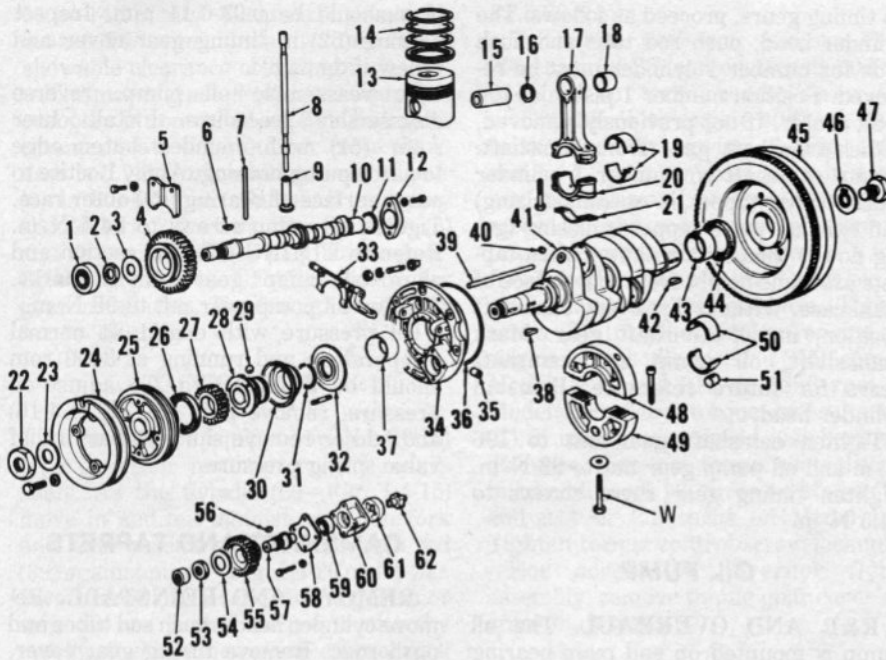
Exploded view of crankshaft, camshaft and oil pump assemblies.
